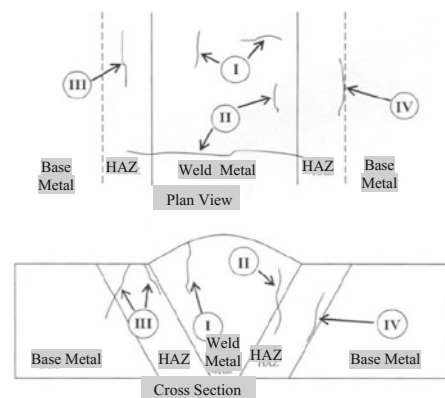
Typical types of embrittlement cracking during welding
